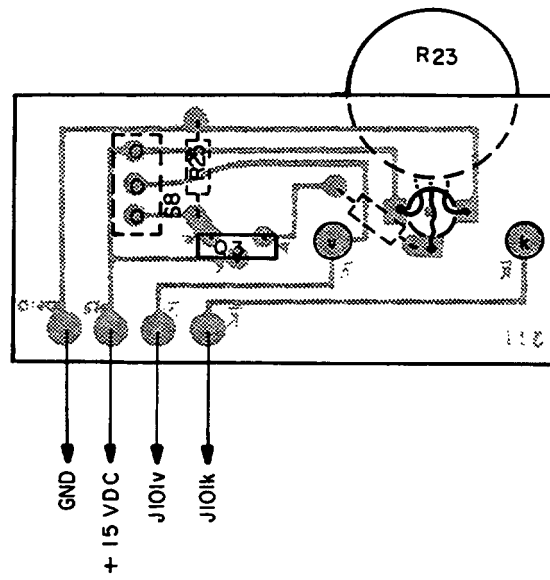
P.C. BOARD ASSEMBLY, BOARD 211, DRAWING
